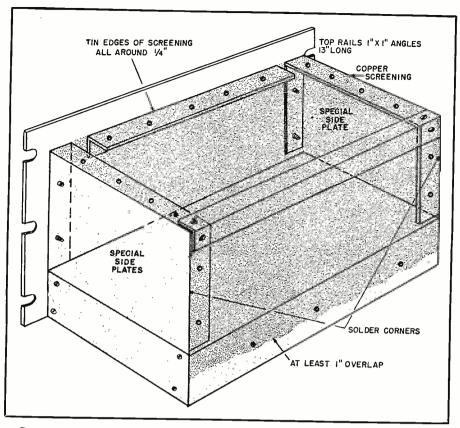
If chassis supporting brackets are not used special side plates made of aluminum can be used. Copper screening would then be necessary only for top and back.
